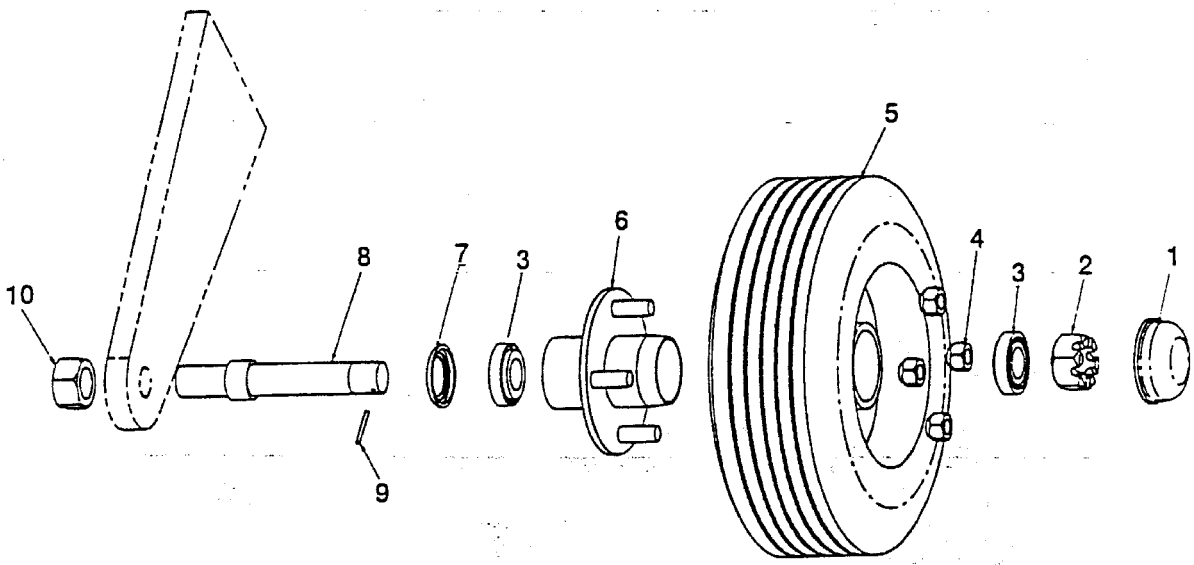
Rear Wheel Assembly (Index No. 11)
